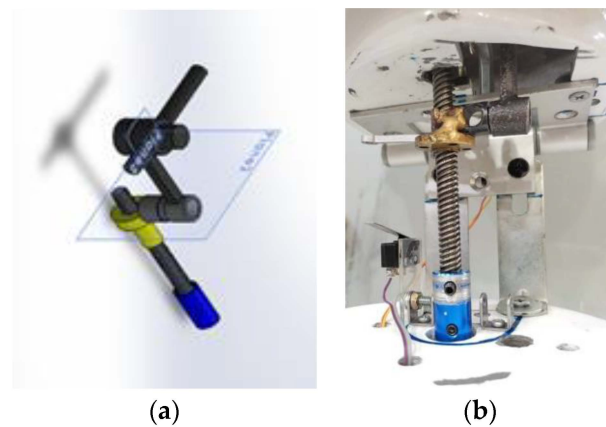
Neck Design: (a) CAD Design of Neck Mechanism; (b) Physical Design of Neck Mechanism.
